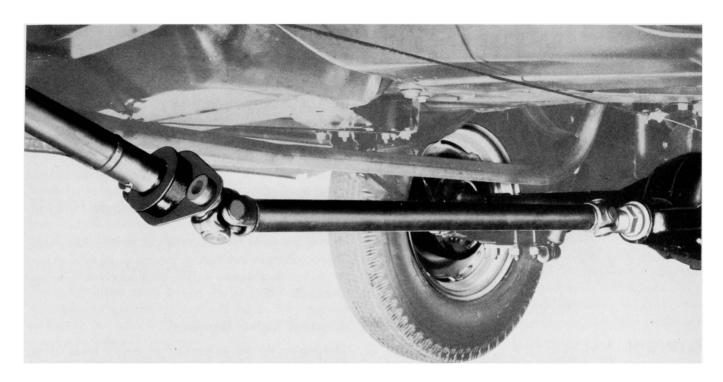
PROPELLER SHAFTS AND CENTER BEARING REMOVAL
